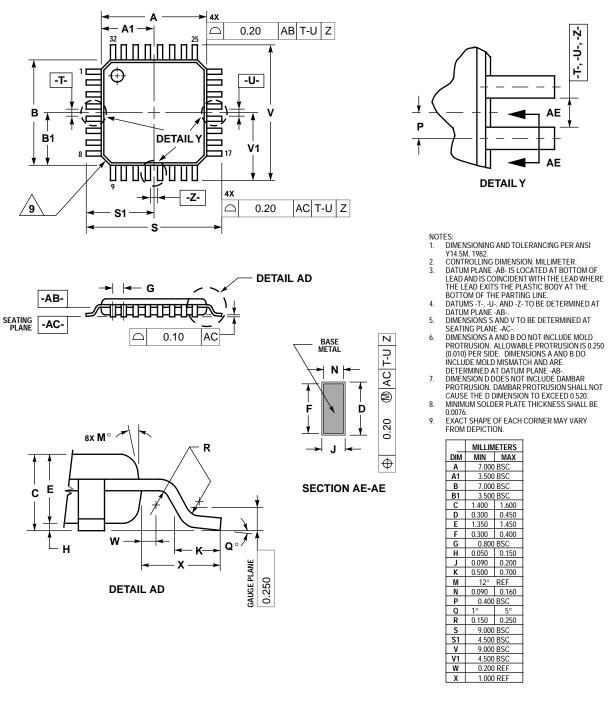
MC68175 Thin Quad Flat Pack (TQFP), Bottom View
